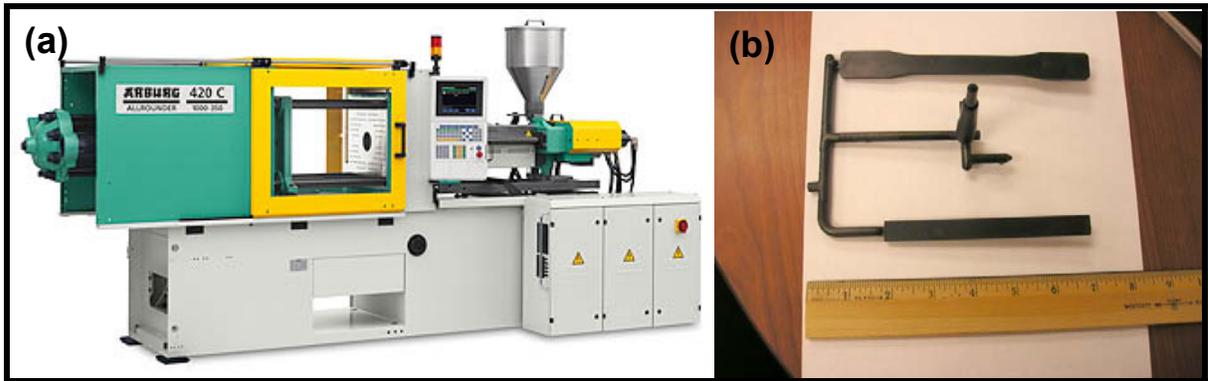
(a) Injection molding machine, (b) CFRP test bars fabricated using injection molding
